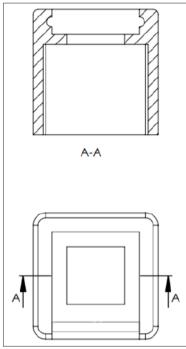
Sectional Cutaway View of the Sensor Enclosure
